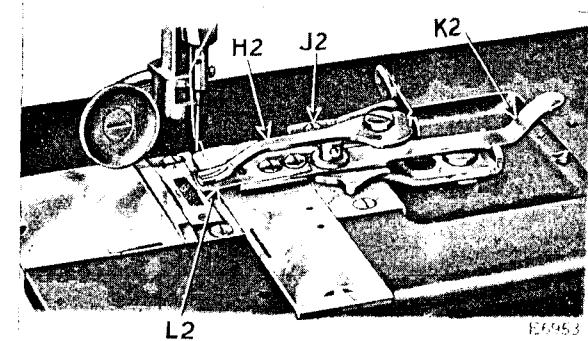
ADJUSTMENTS OF TRIMMER ON MACHINE 110 w 121
